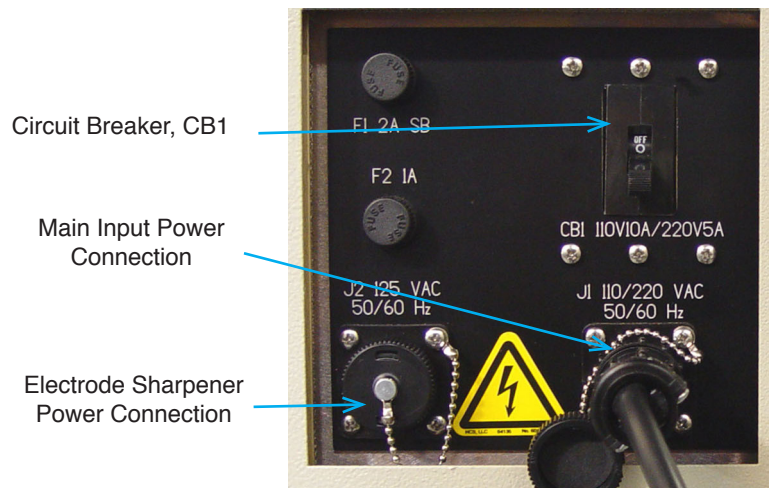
, Right Side View Showing Circuit Breaker CB1
